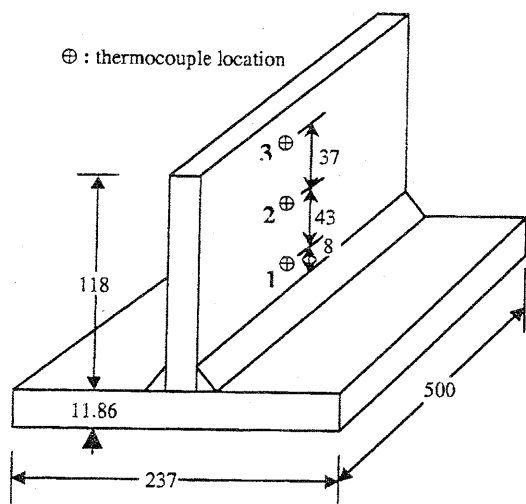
Manufactured and analysed welded T-joint (all dimensions in mm).
